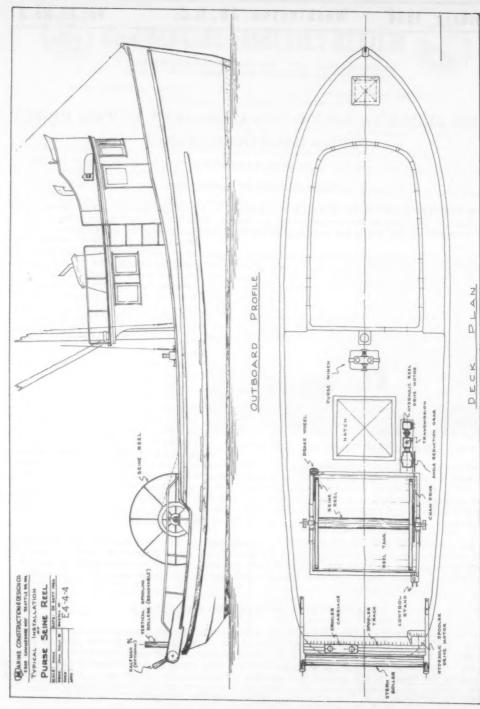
TYPICAL DRUM SEINER SHOWING ESSENTIAL COMPONENTS OF GEAR.
